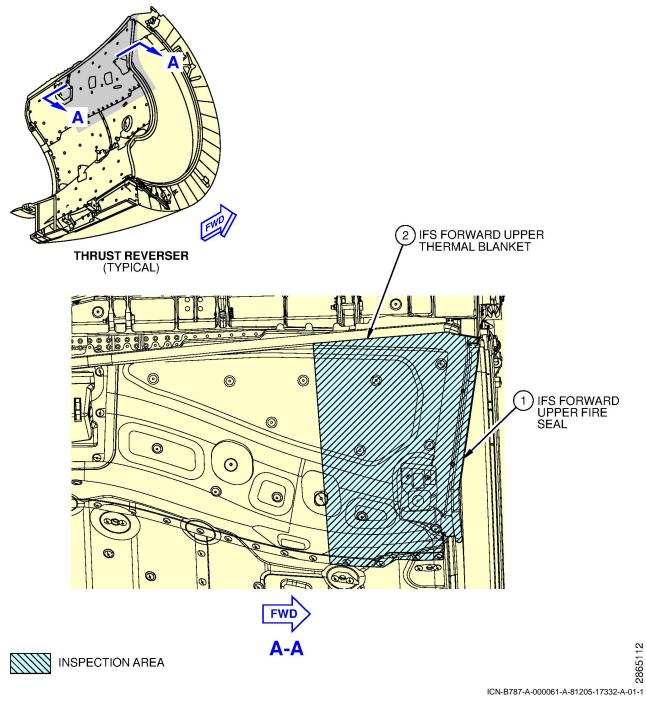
Engine - Thrust Reverser - Inner Fixed Structure (IFS) Forward Upper Fire Seal and Thermal Blanket - General Visual Inspection Area (Right Opposite)
